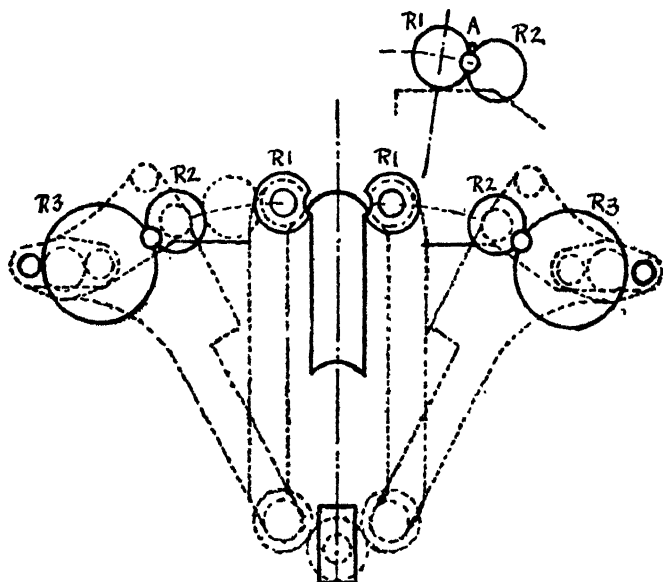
PASTING DEVICE OF THE "MURRAY" CASING-IN MACHINE.
